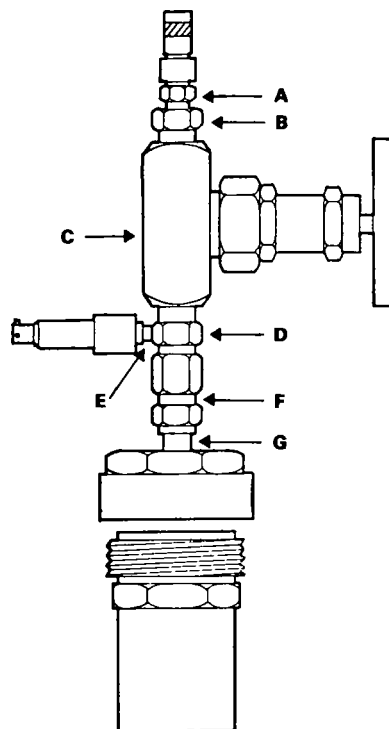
Drawing of the improved oxygen bomb test apparatus showing details of construction: A. Swagelok quick-connect body SS-QC4-C-2PM; B. Cajon reducing bushing SS-12-RB-2; C. Shut-off valve, Whitey SS-12NBF 8; D. Cajon hex nipple SS-8-NH; E. Adapter, threaded to receive transducer and welded to Cajon hex nipple; F. Swagelok female connector SS-1010-7-6; G. Original stem 0.625 in. OD.
